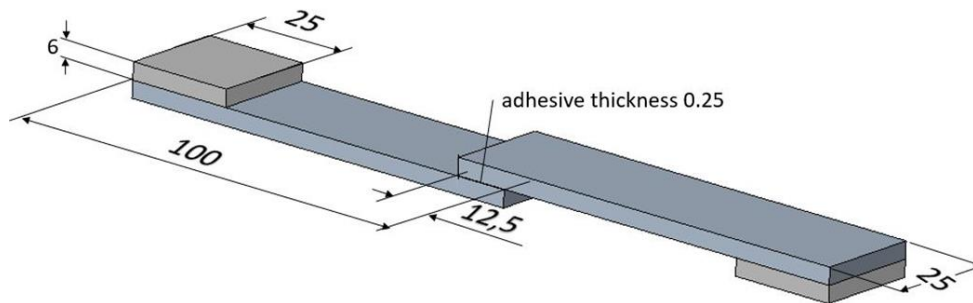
Single lap shear test specimen geometry, the dimensions are expressed in mm.
